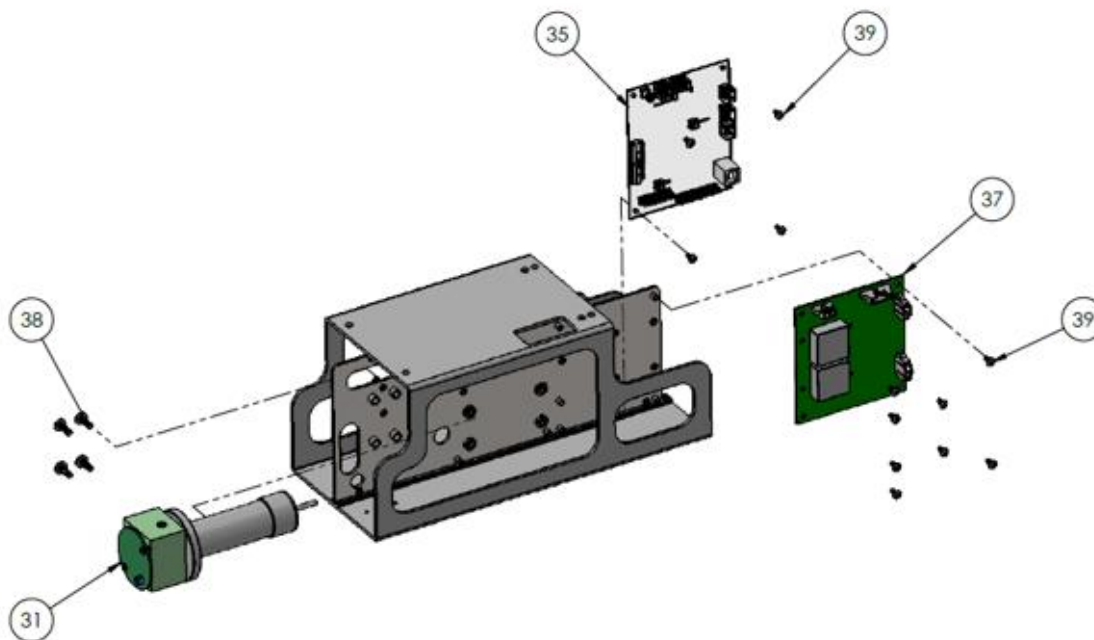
Exploded View of APC, Internal Assembly, Other Side.
